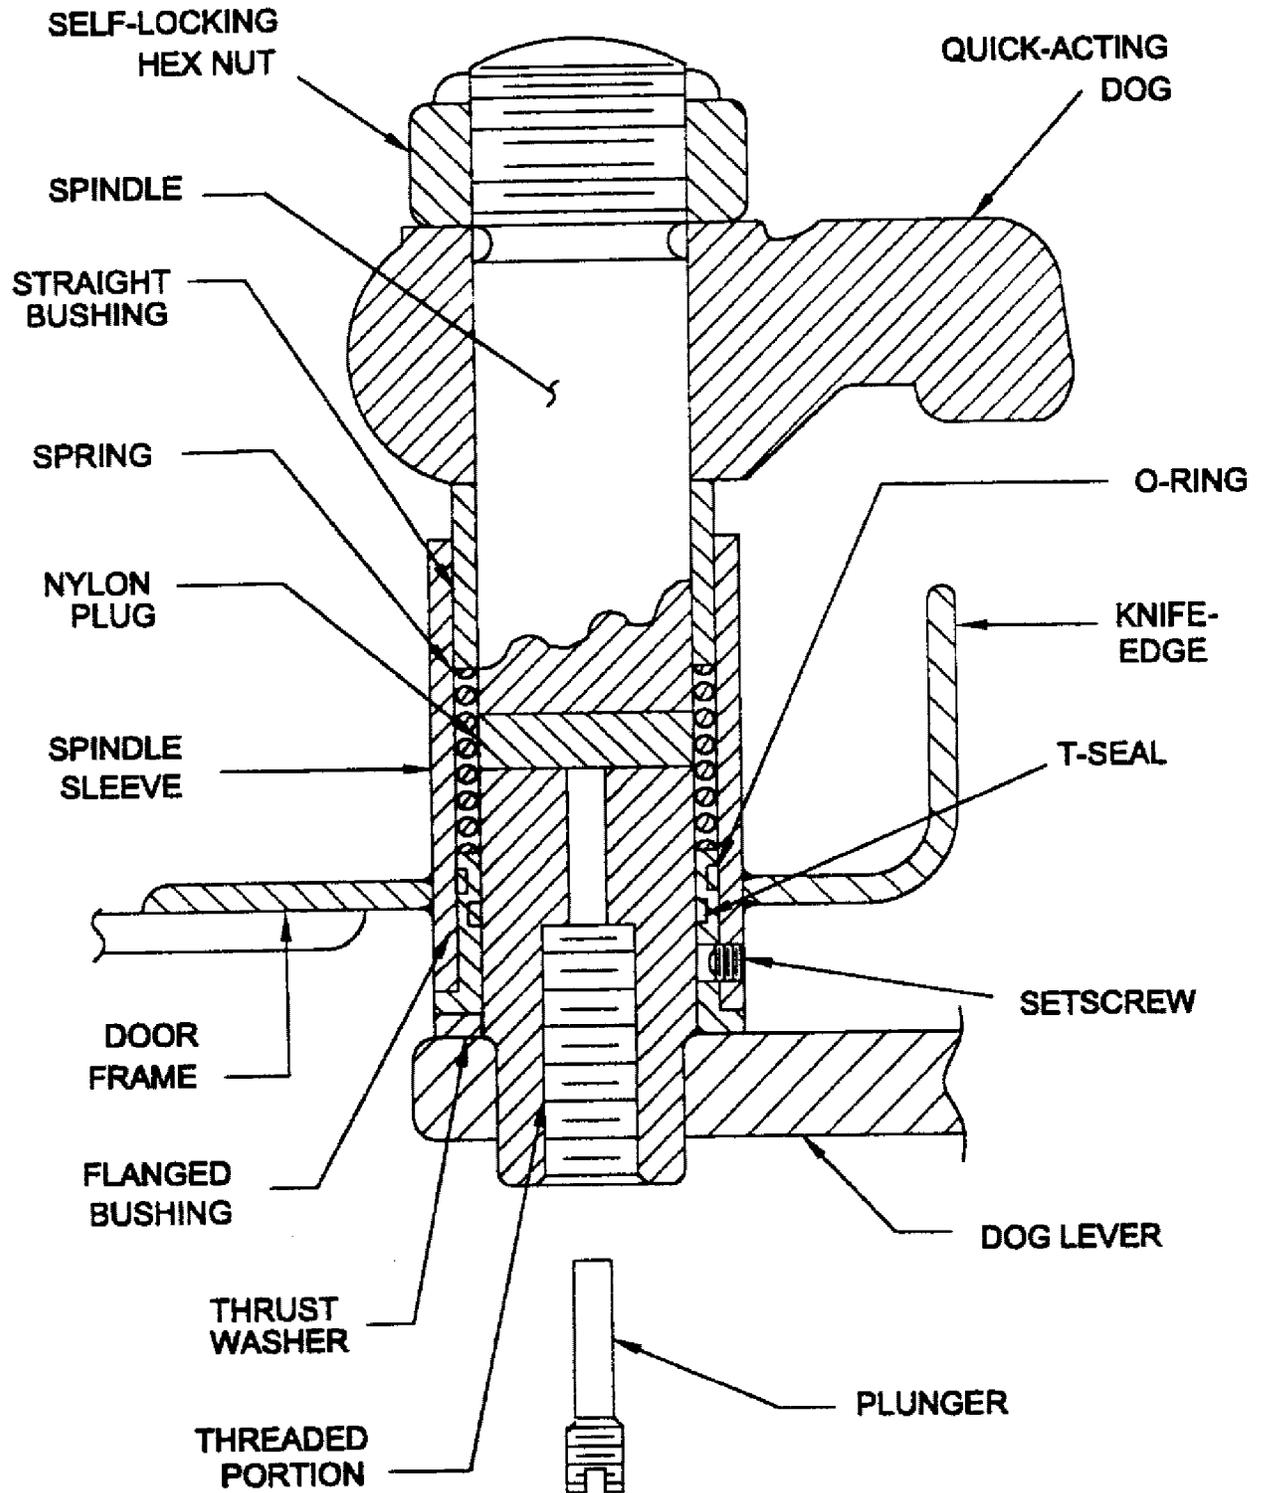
Quick-Acting Door Dog Assembly (Cross Section View) Modified by MACHALT 167-31006 (ECP-486)
